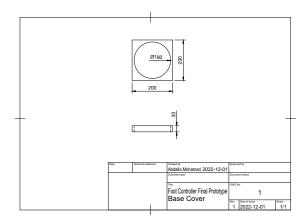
Foot Controller Final Prototype Base Cover Technical Drawing
